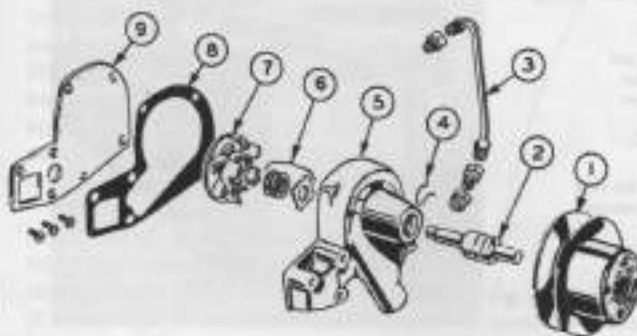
Late style pump used on some Continental engines. Shaft and bearings are furnished as an assembly.
